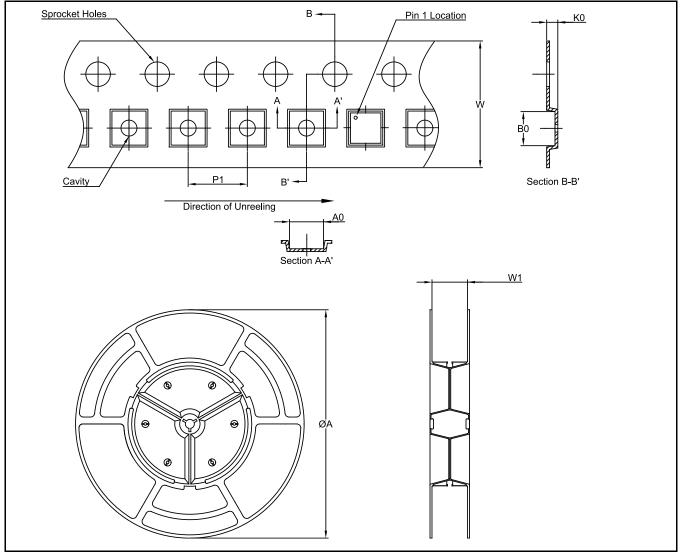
Embossed carrier tape and reel outline (NOT TO SCALE)
